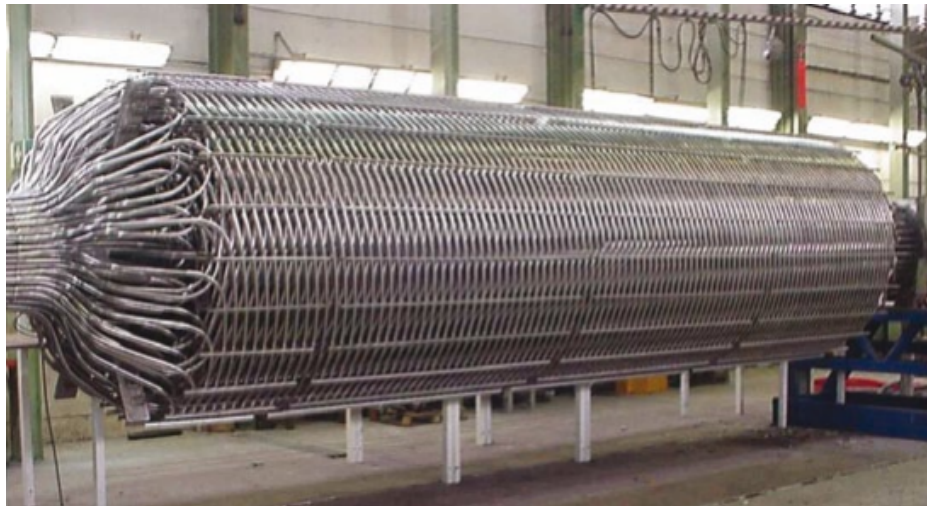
A bundle of helically coiled tubes in a HCHE [23]
